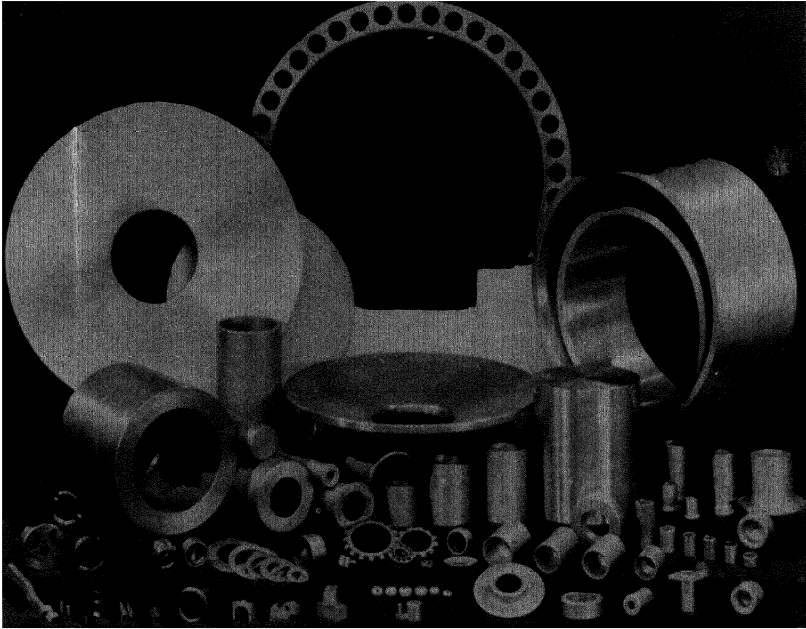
Display of porous bronze bearings and bushings of various sizes. Also shown in the picture are ball bearing races, porous bronze stock for machining individual bearings, and a number of levers, arms, and similar shapes of more intricate design. The gear assembly at the lower left-hand corner is an oil pump gear set and made of iron. (Courtesy of Amplex Division, Chrysler Corp.)
